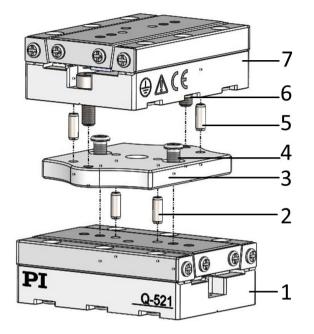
Example: Mounting a Q-521.240 on a Q-521.240
